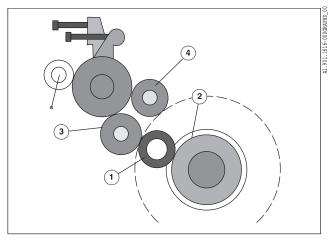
Adjusting the inking form rollers with the adjusting ring
